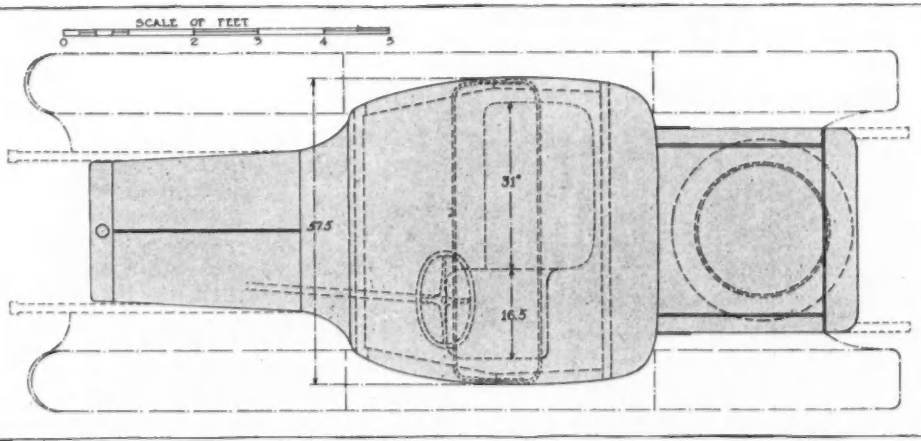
Plan view, with principal dimensions. Note staggered seating and spare tire
